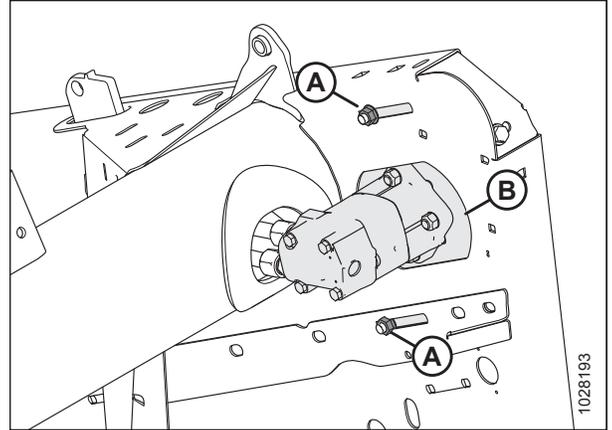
Knife Drive Motor – Double-Knife Header, View from Rear
